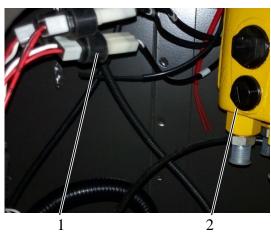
1Wiring harness connector 2 Pilot valve
